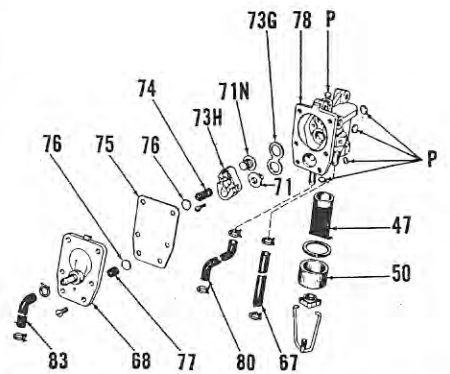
Exploded view of diaphragm type fuel pump used on late models.
